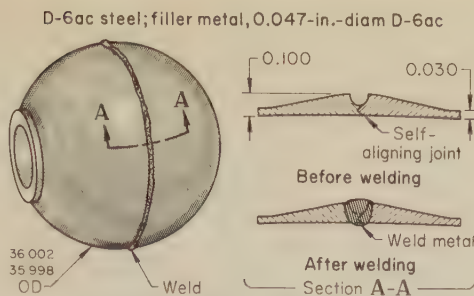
Rocket-motor case gas tungsten-arc welded from two spun hemispheres that had been quenched and tempered before welding (Example 201)
